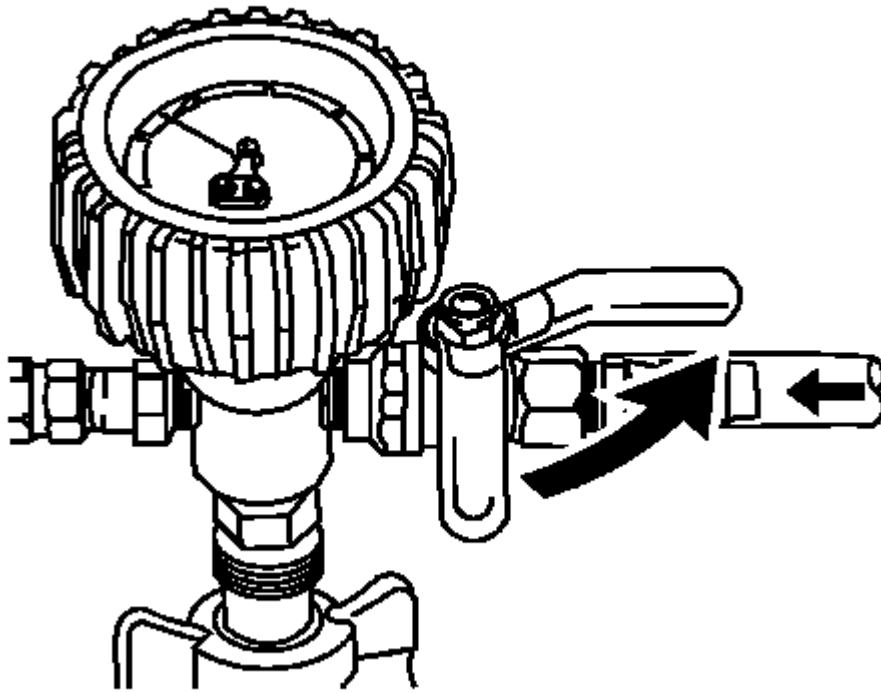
Identifying Valve On Vacuum Gage Assembly
